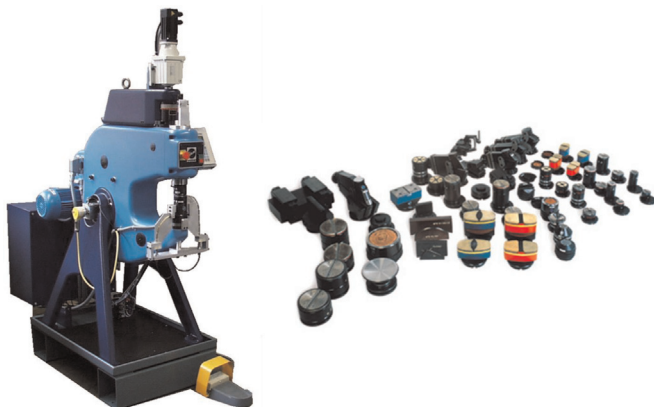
C-frame driving machine and appropriate tool sets for diverse forming procedures.
